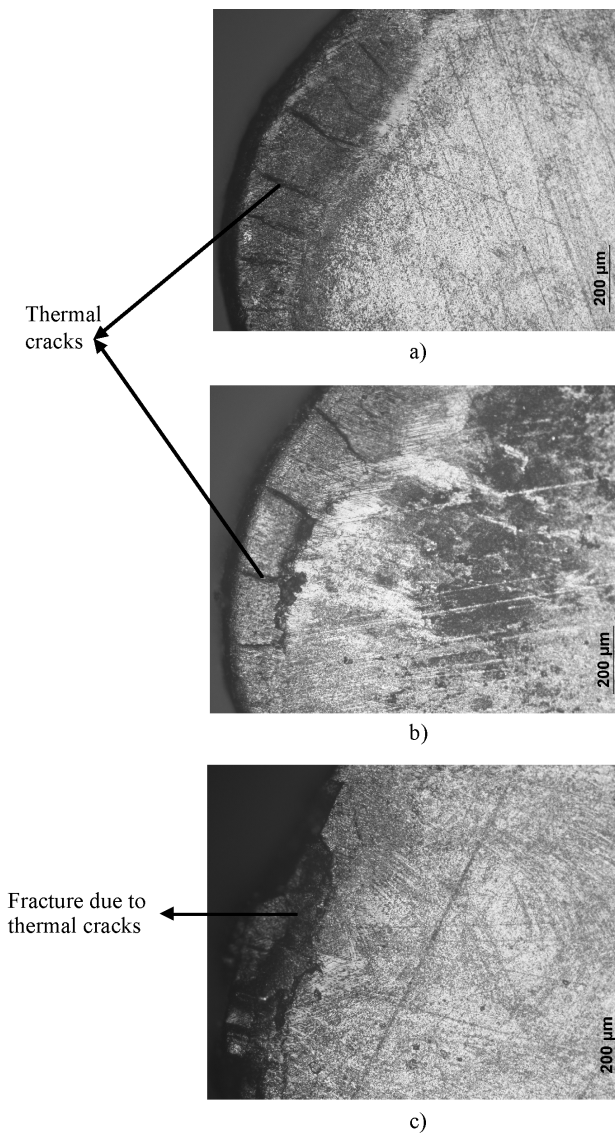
A typical view of the cracks on the uncoated tool after milling the dual-phase sample with: a) 30 HRC, b) 35 HRC, c) 40 HRC (100-times)
